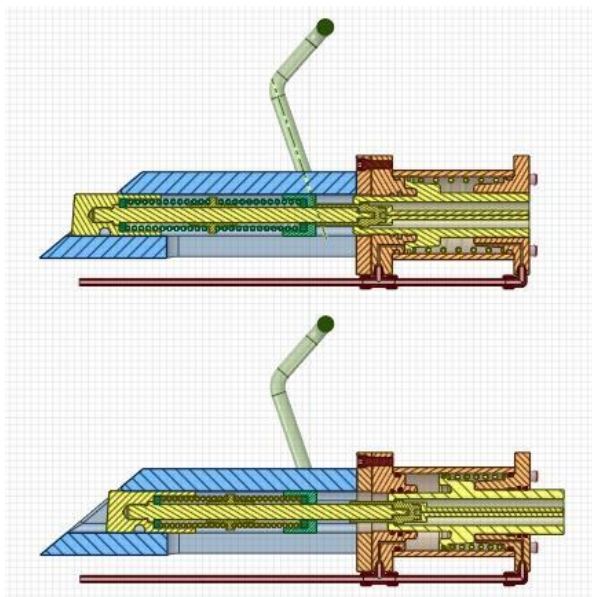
Hydraulic Actuator System and Locking Mechanism assembly (see ref. \14\).
